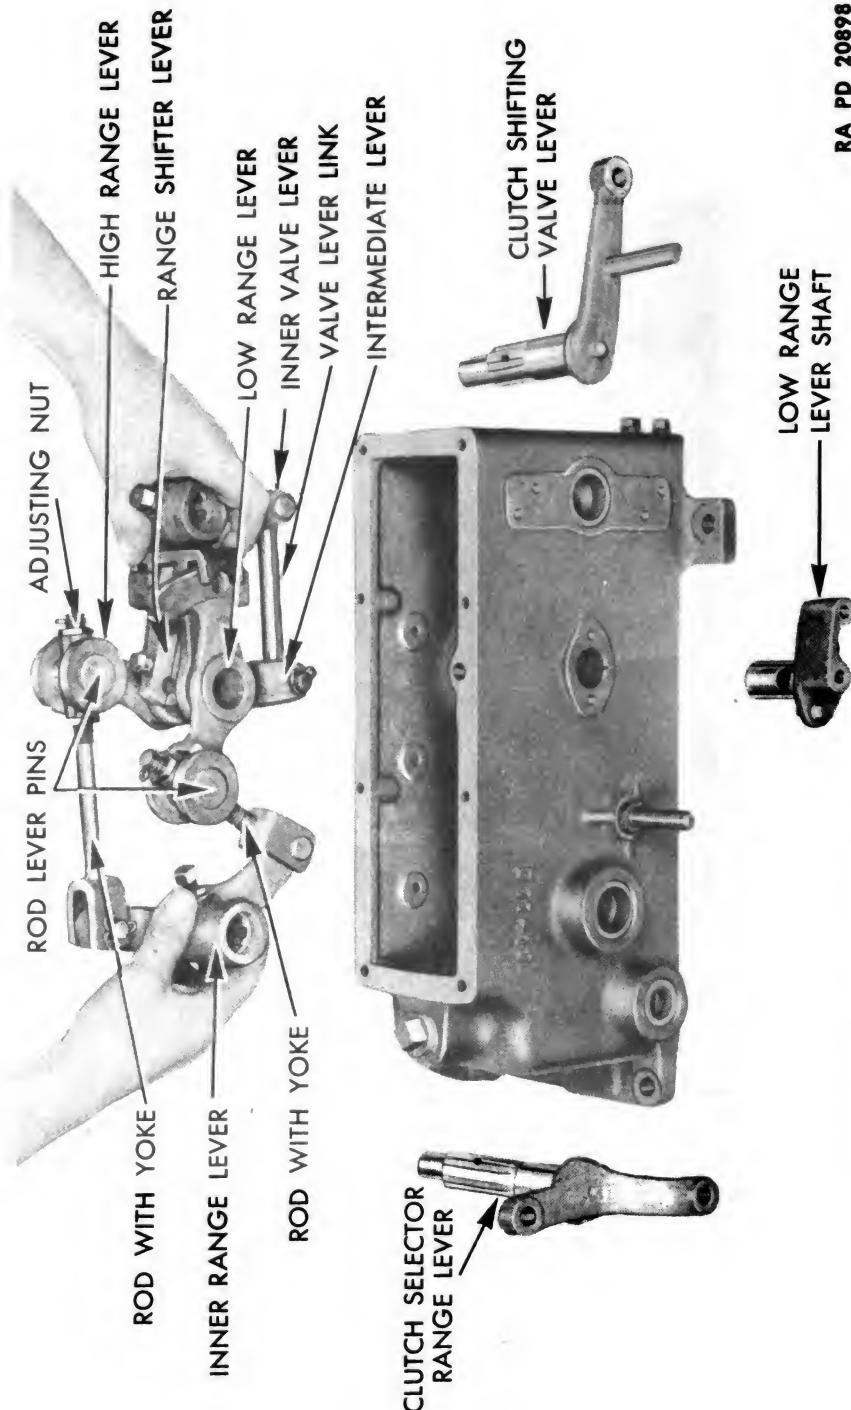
Removing Lever Assembly from Clutch Selector Housing
